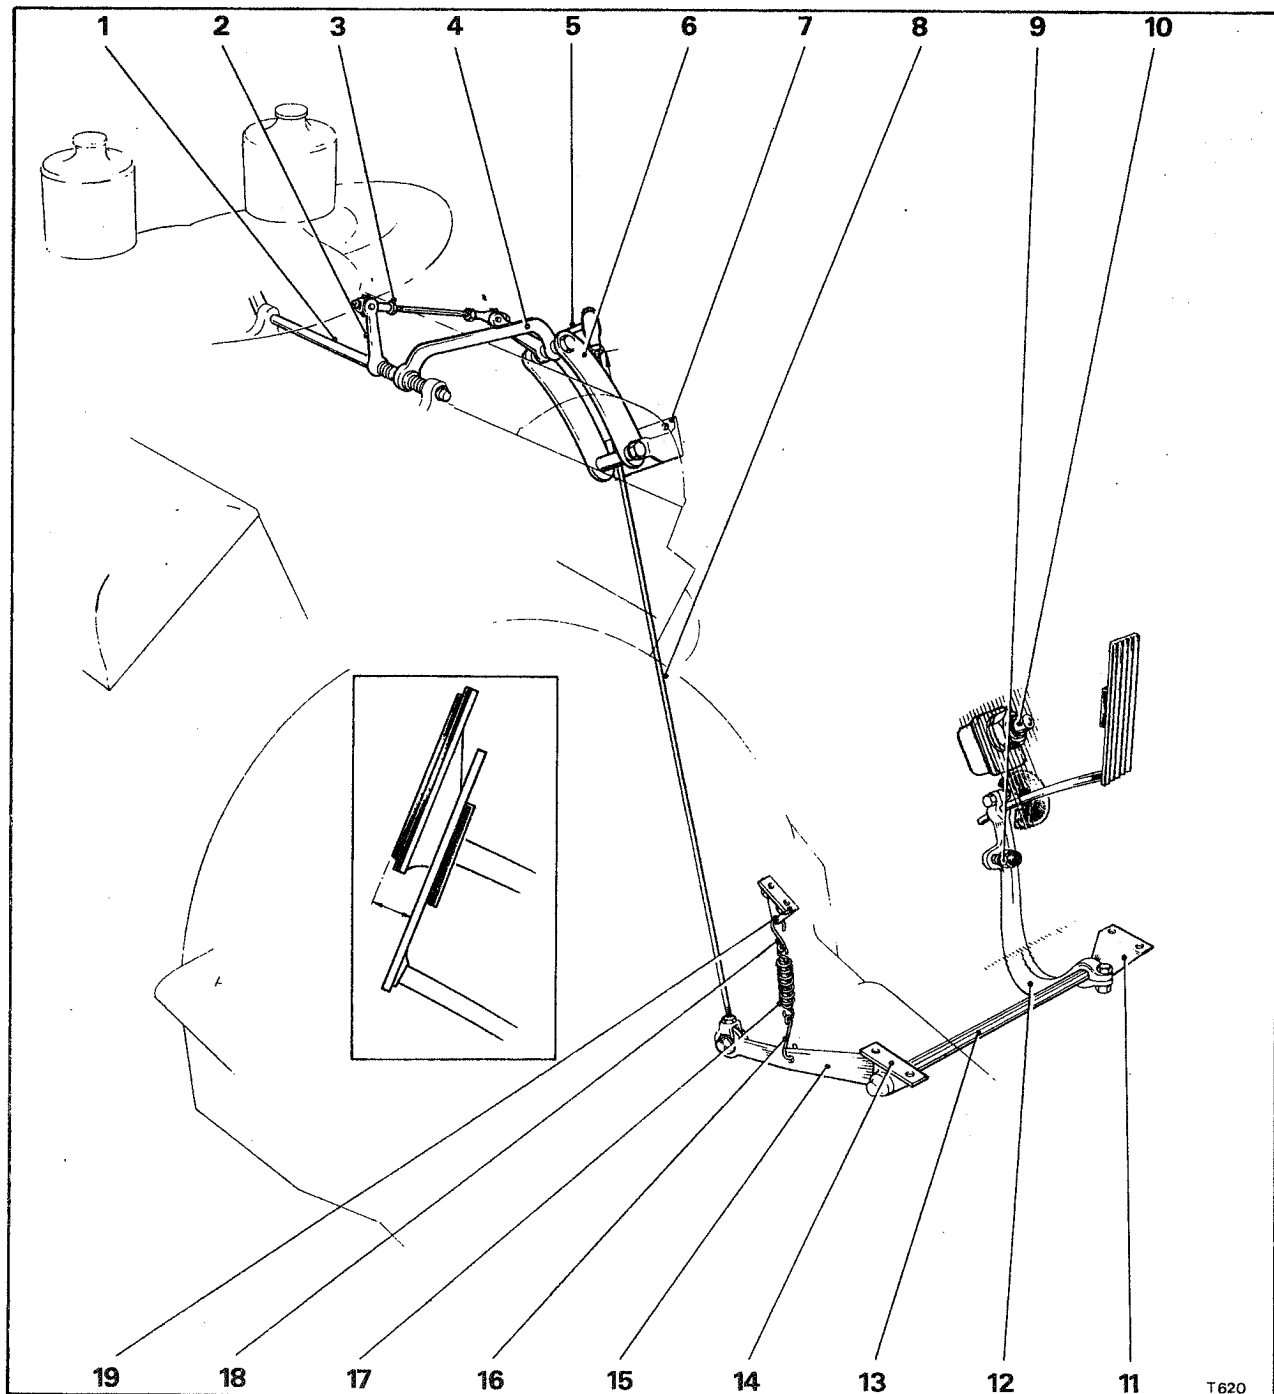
S.U. carburettor accelerator pedal and isolator mechanism (right-hand drive cars)
